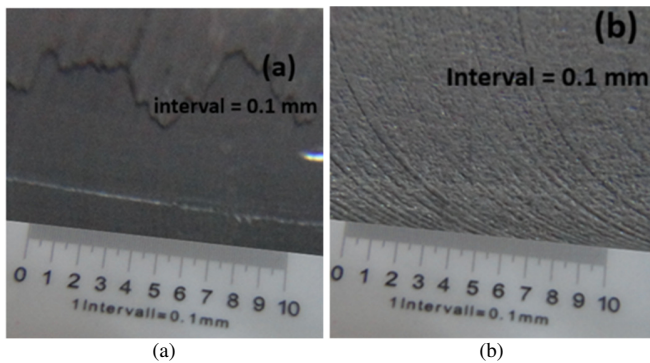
Appearance of the welded joints at 1600 rpm with: (a) 20 mm/min and (b) 100 mm/min.
